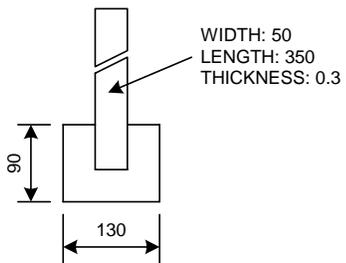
ANTENNA TUNER Installation (outdoor)
